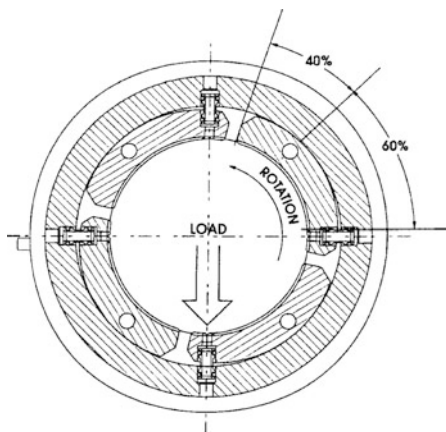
Flexure pivot tilt-pad radial bearing (Photo used by permission of Waukesha bearings)
